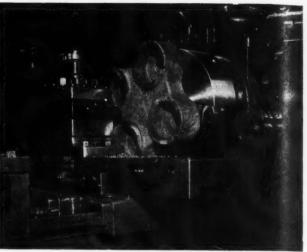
Carbide-tipped Inserted-bit Tool Taking Interrupted Cut on Steel Casting
